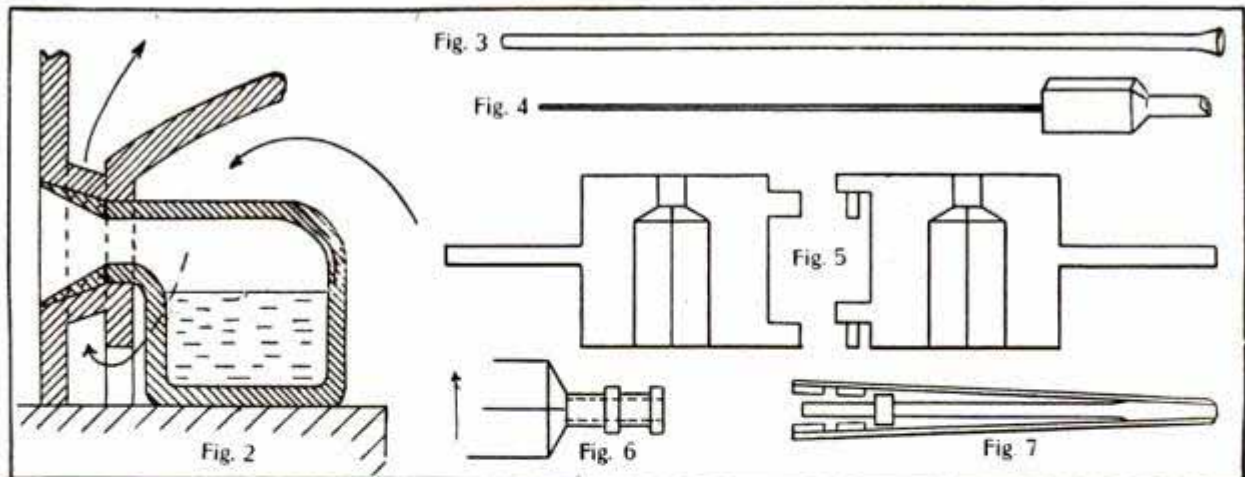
Single Pot in Pot Furnace. Fig. 3--Blower's Pipe. Fig. 4--Holder for Hot Bottles. Fig. 5--Die. Fig. 6--Neck of Bottle. Fig. 7--Tongs for Shaping Neck.
